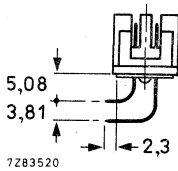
Male part with 90° angled dip-solder pins; dimensions are identical with those in Fig. 2, except as shown.
